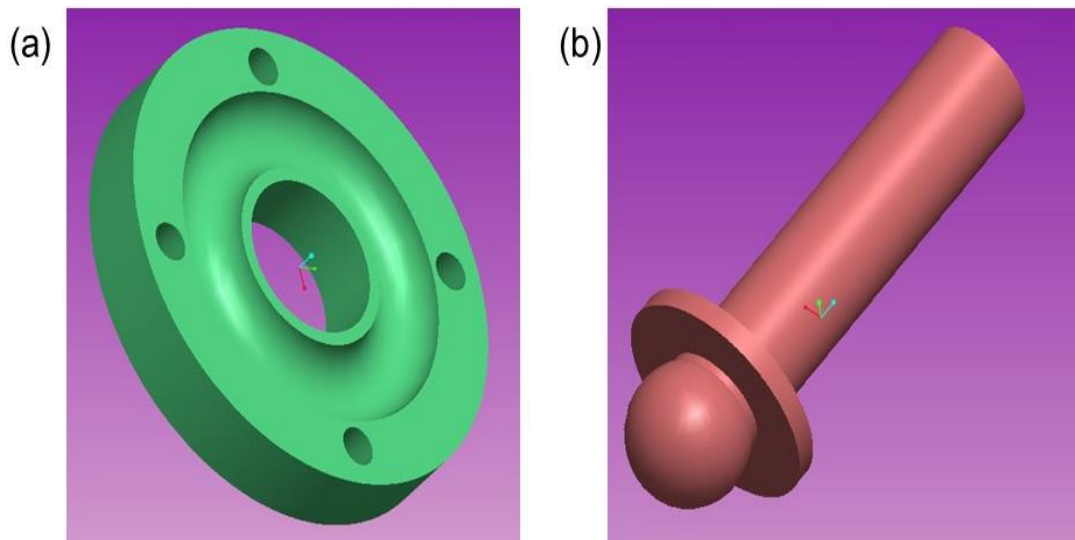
(a) Disc shaped insert with a 0.25inch race channel, and (b) Pin with a 0.25inch bearing ball and collar welded in place.
